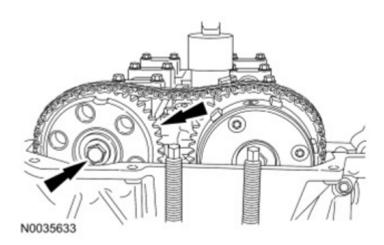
Locating Exhaust Camshaft Drive Gear And Bolt Courtesy of FORD MOTOR CO.
